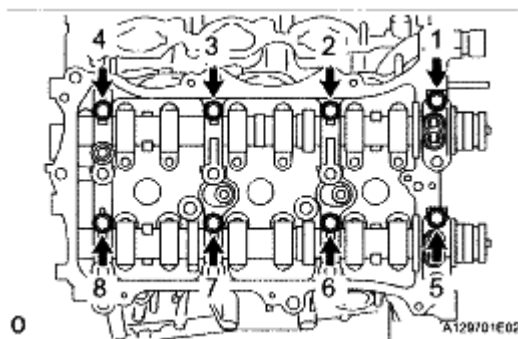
Identifying Camshaft Bearing Caps Bolts Tightening Sequence
